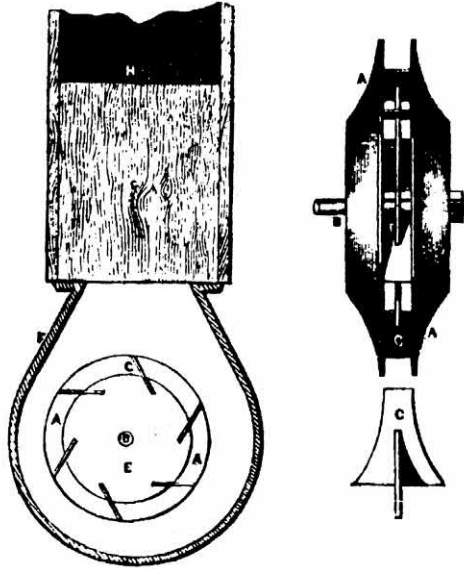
The APPOLD pump of 1850, begins to resemble some current designs. The advantages of straight non-radial blades seems to have been understood. Doubtless this contributed to the much improved efficiency of the machine. (Reproduced from *E. Grist, Cavitation and the Centrifugal Pump-A Guide for the Pump Users*. Taylor and Francis, 1998.)
